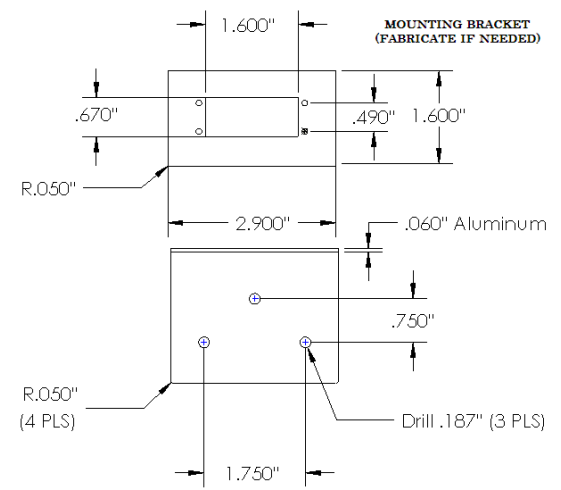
Mounting bracket for ELT Remote Unit (Continued)
